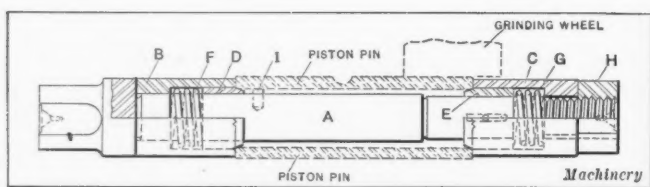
Spring Bushing Mandrel for holding Piston Pin from End, thus eliminating Clamping Strains
